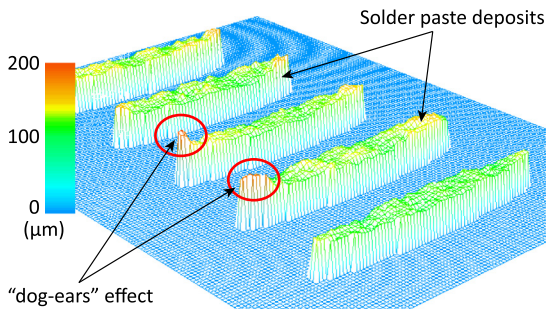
SPI (solder paste inspection) image of deposits for QFP component; edge of solder paste is lifted (dog-ears) because of inappropriate stencil separation speed.
